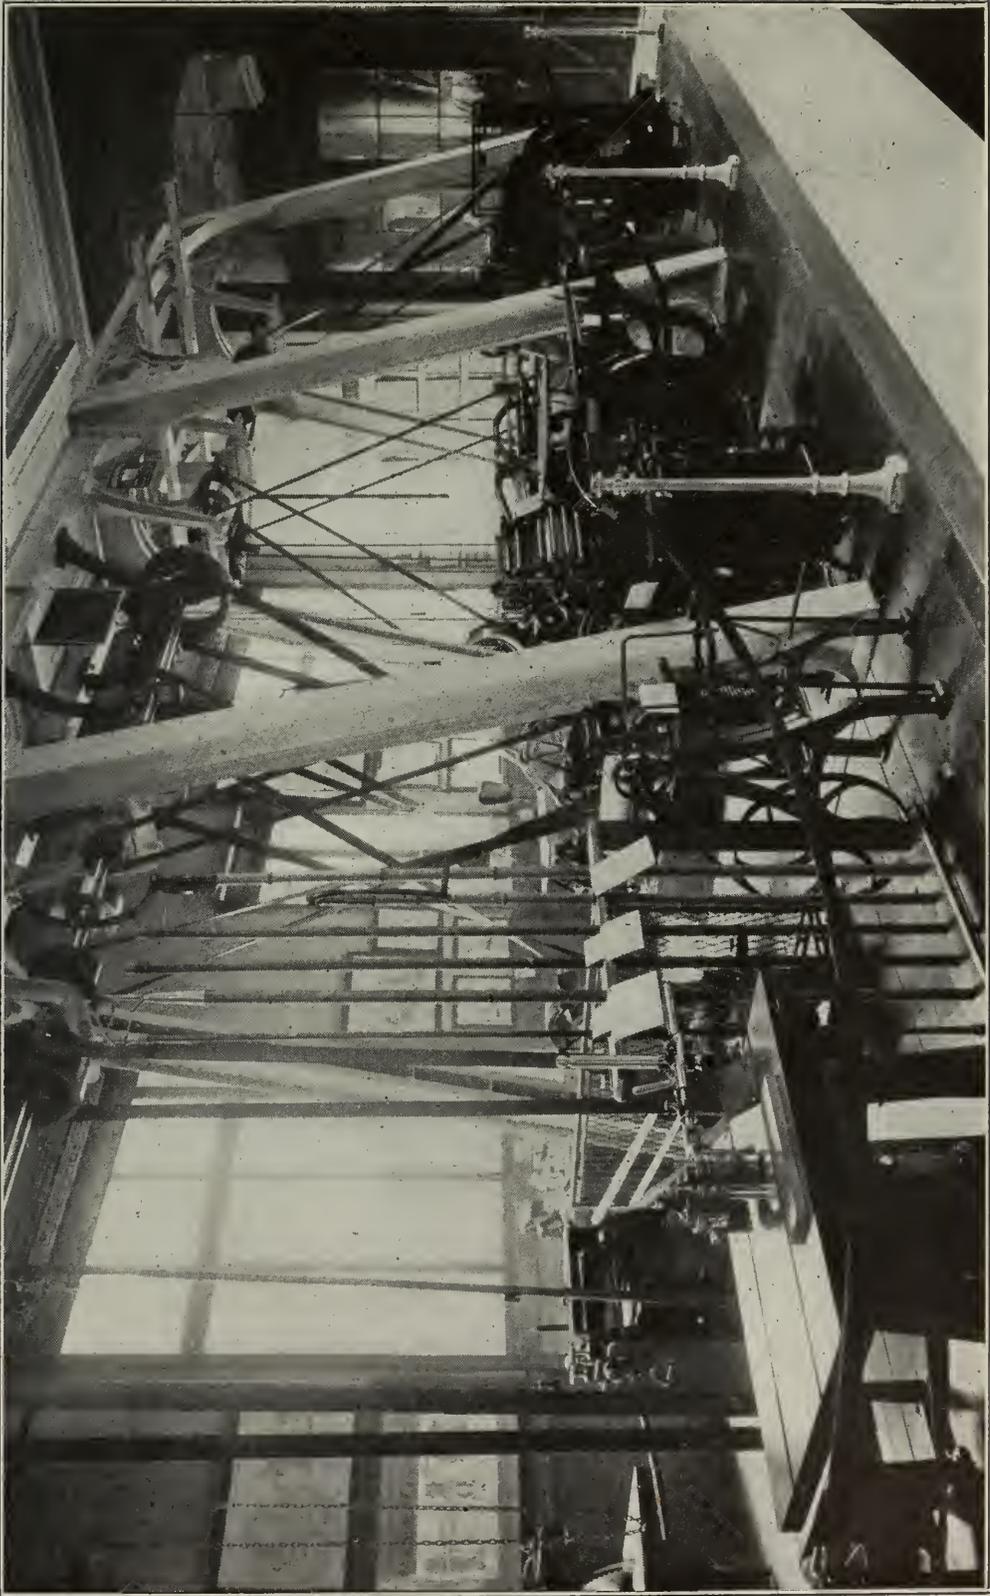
BELT SHIFTERS AND PROTECTIVE DEVICES FOR PRINTING MACHINERY.
